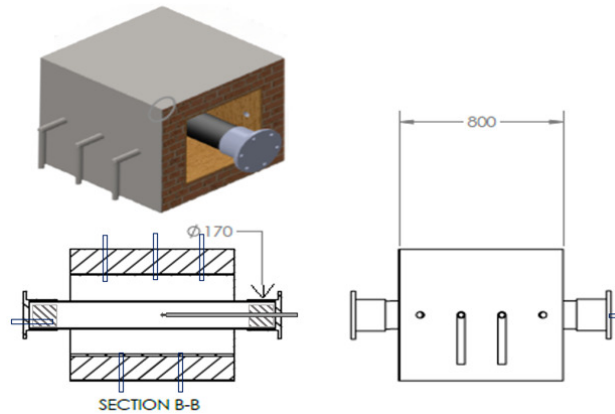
Technical drawing of the model Pyrolysis Furnace[10]
